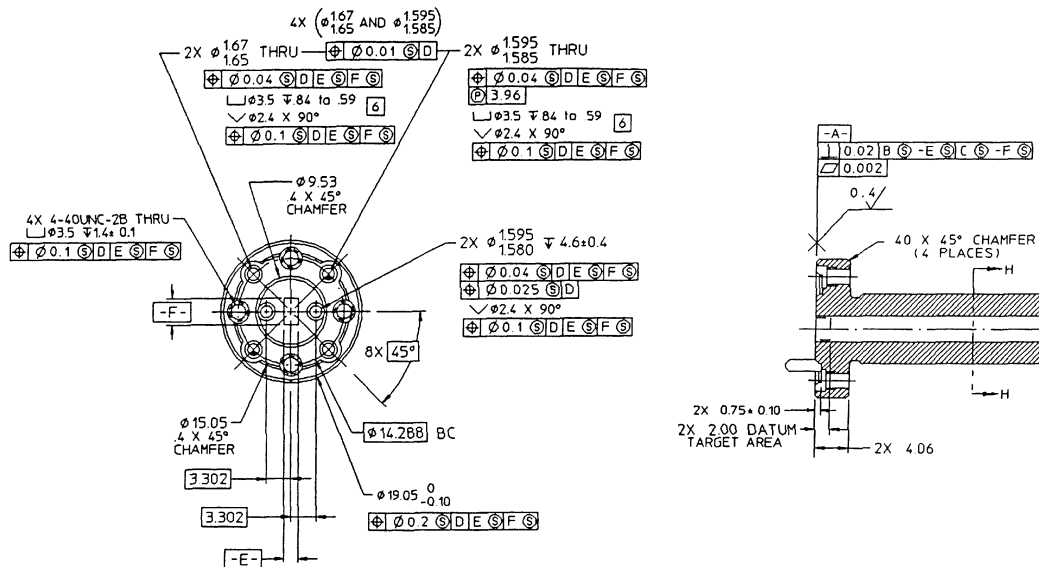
The HP anti-cocking flange as used on their VNA and calibration components (from Hewlett-Packard). Dimensions in mm.
